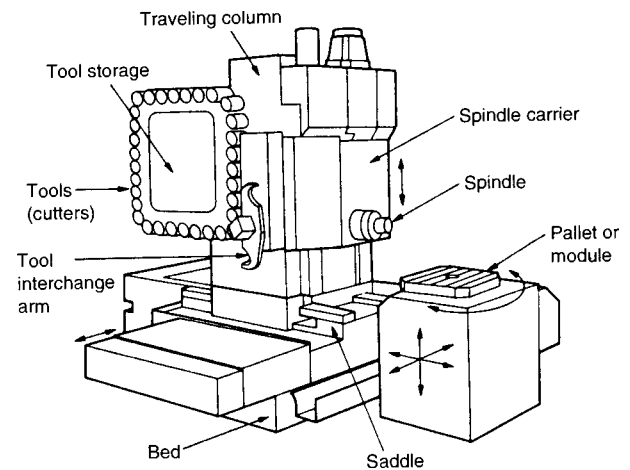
Schematic of a horizontal spindle machining center, equipped with an automatic tool changer. Tool magazines can store 200 different cutting tools.
